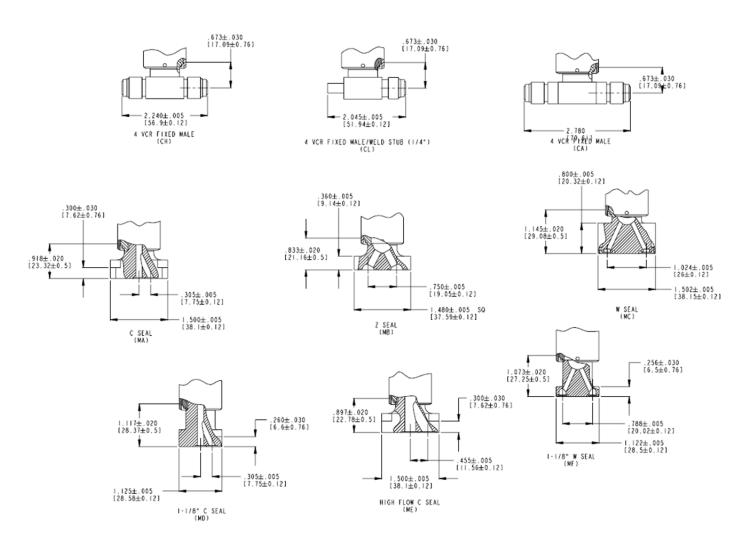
Dimensions of Additional Fittings for the Type AA08A Transducer
